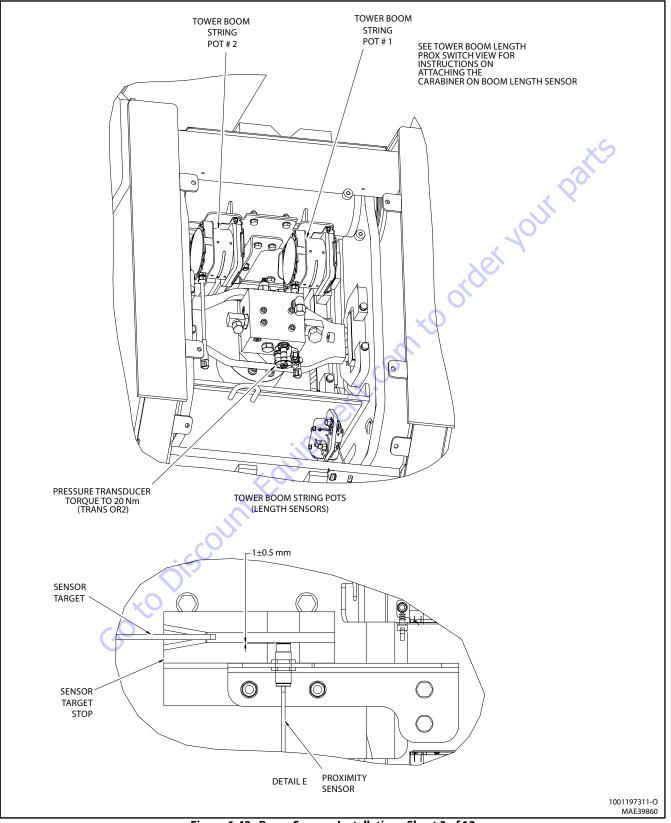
Boom Sensors Installation - Sheet 3 of 13
